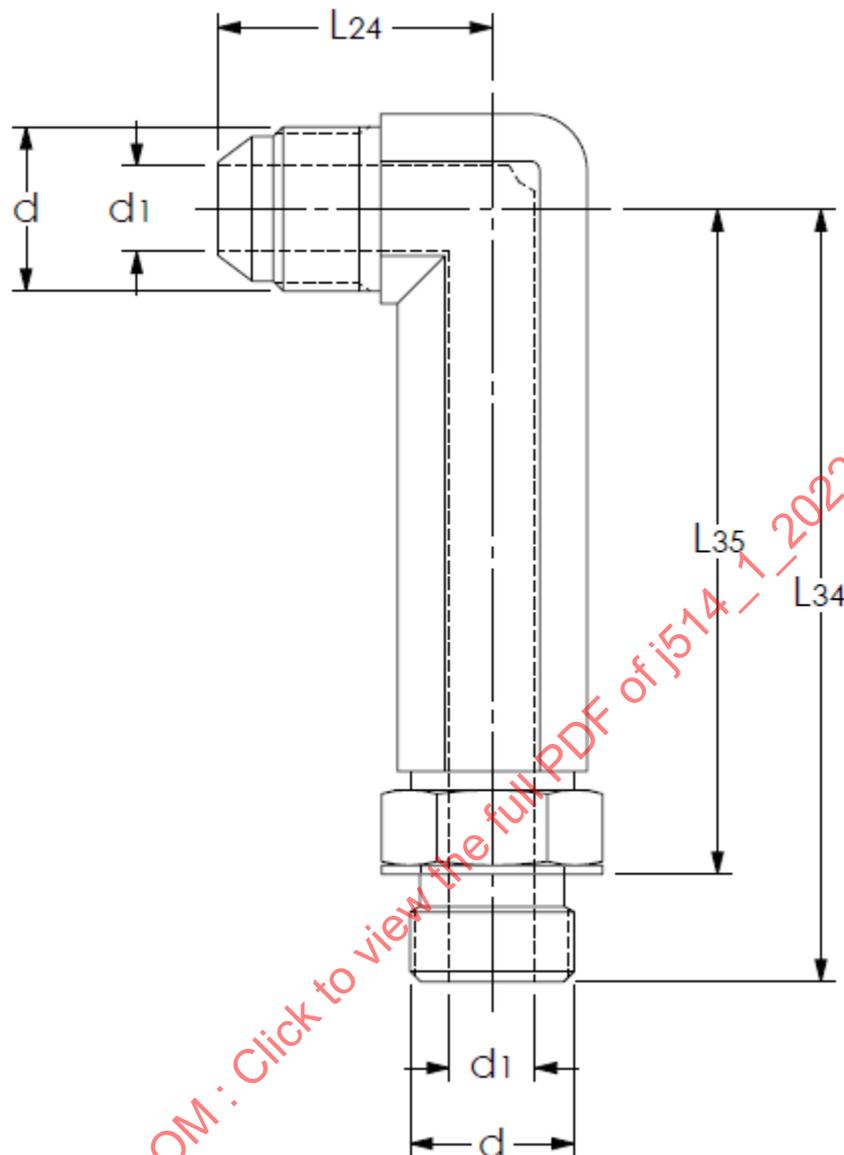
90 degree straight thread elbow, extra extra long (072120, 07M2120)
